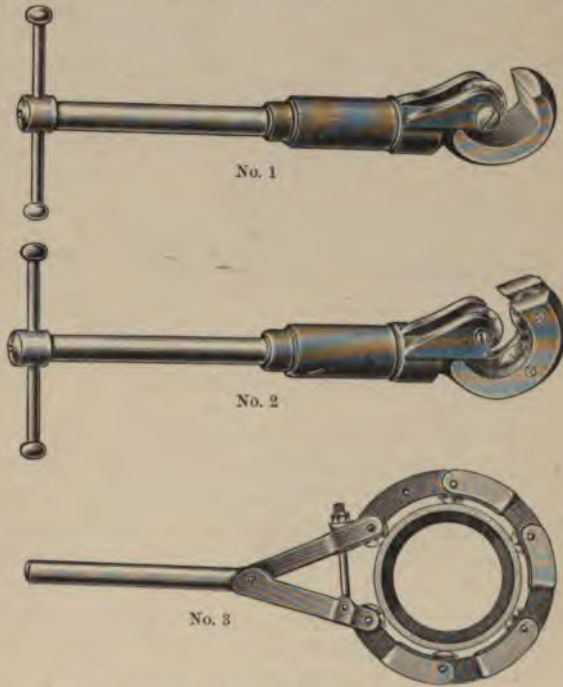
Iron-pipe Cutters: No. 1, Single-wheel; No. 2, Three-wheel; No. 3, Multiple-wheel.
